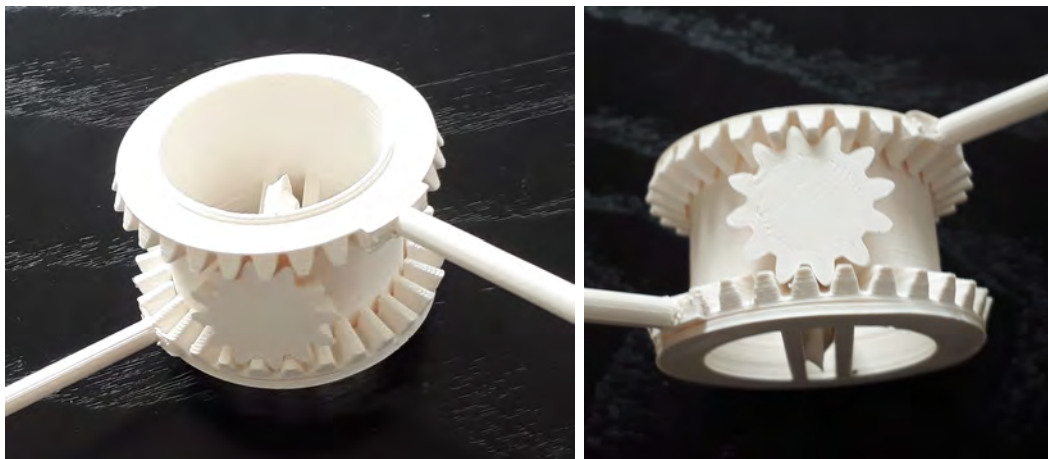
Main mechanism: the bisector (possibly added by a constant angle as explained in Section 4.3) works thanks to three conical gears. The axis of the little conical gear determines the plane of the wheel that touches the plane.
